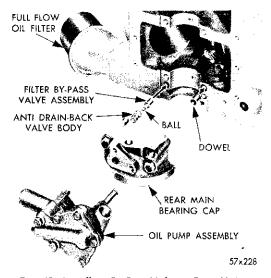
Installing By-Pass Valve — Rear Main Bearing Cap
